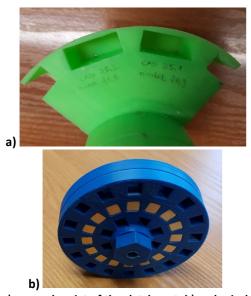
a) a sample print of the clutch part, b) a physical model obtained after assembling the components
